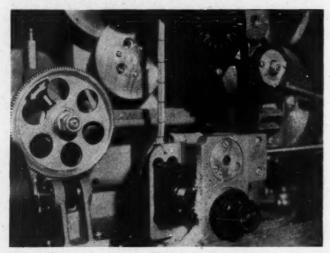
Machine of Fig. 4 with cover plate removed. Snow accumulating around clutch mechanism caused ultimate jamming by forming ice on moving parts
